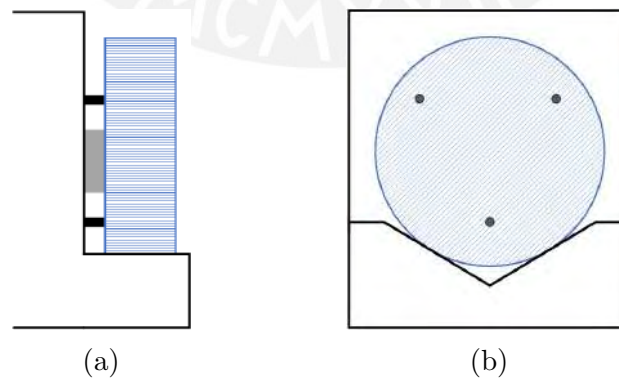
Mirror positioning (a) Side view (b) Front view
